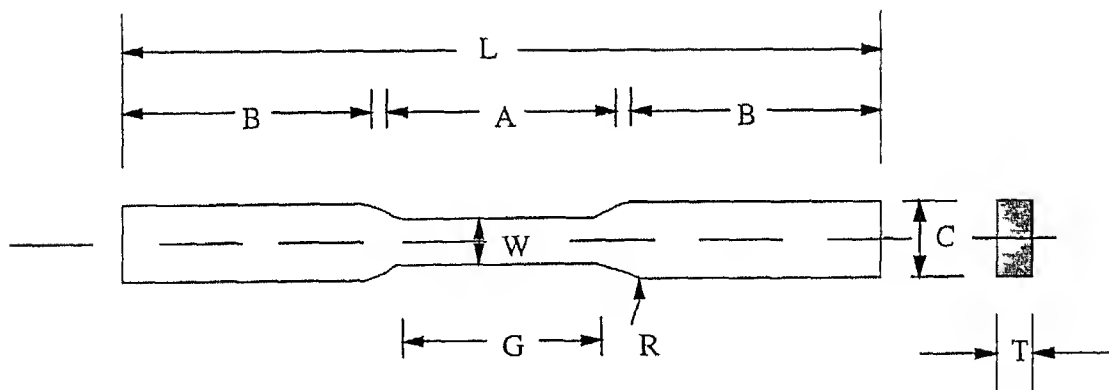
Rectangular tension-test specimens[ from ANSI/ASTM Standard A 370-77]
